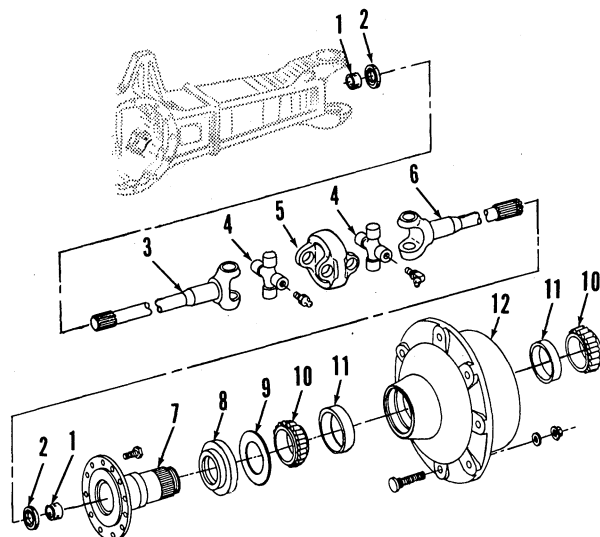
Exploded view of wheel hub assembly and axle shaft assembly. Washer (9) is not used on 4650 and 4850 tractors.
